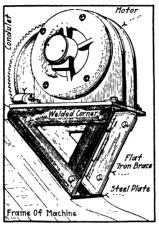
A 10 hp. motor mounted on an inclined side of a machine shear. The support consists of two 6 by 6 by 1 in. steel angles bent to allow the motor to rest horizontal as shown and braced at the open end with 3 by 3 by 3 in. steel angles. In bending an angle, one leg was cut, and the other then bent as desired. The parts of the cut leg were then welded with an acetylene torch. (A. S. MILL, Electrical Review and Industrial Engineer, page 119, March, 1922.)
